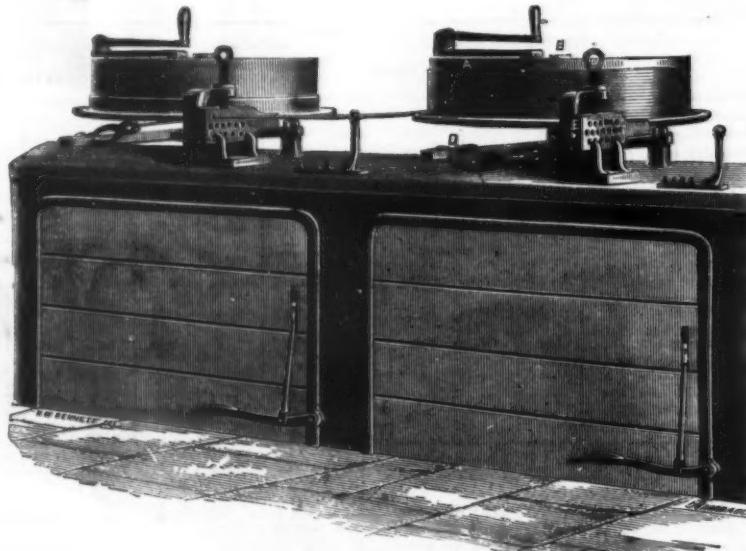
MANUFACTURE OF WIRE ROPE.
